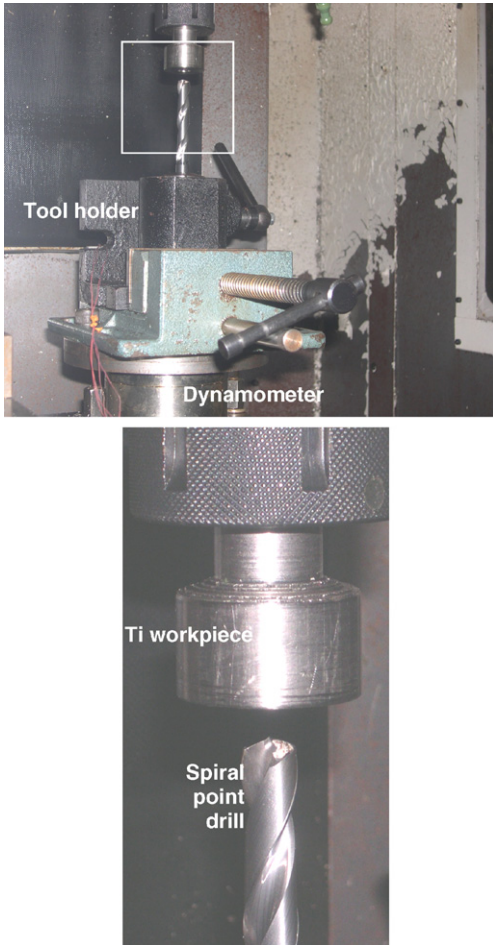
Experimental setup with workpiece in the spindle and drill in a vertical tool holder.
